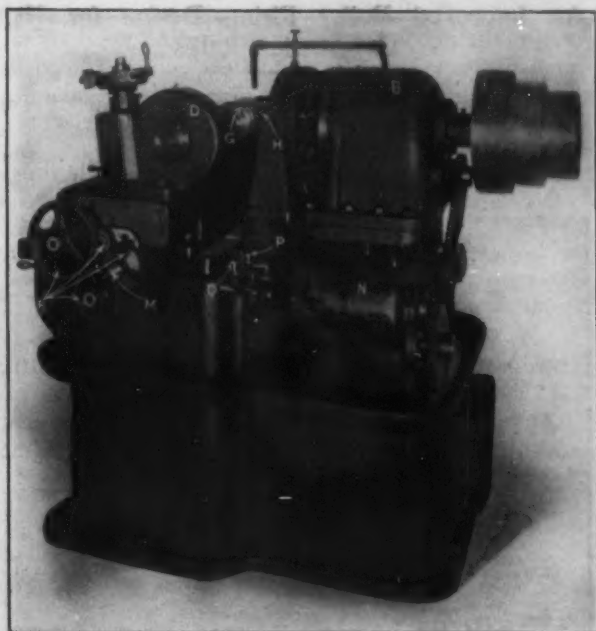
End View Showing the Drive and the Change Gear Box.
